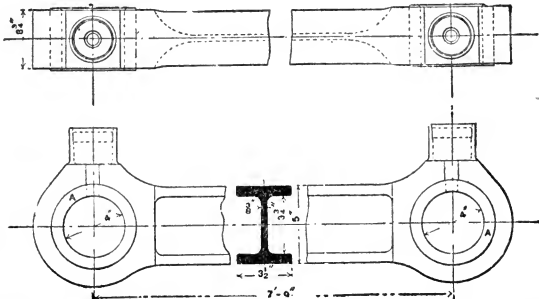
,938 and 1,939.—Non-adjustable coupling rod. The bearings consist of bushings which are pressed into position and sometimes held from turning by a set screw. These brasses when worn are replaced by new ones bored to fit the pins.
